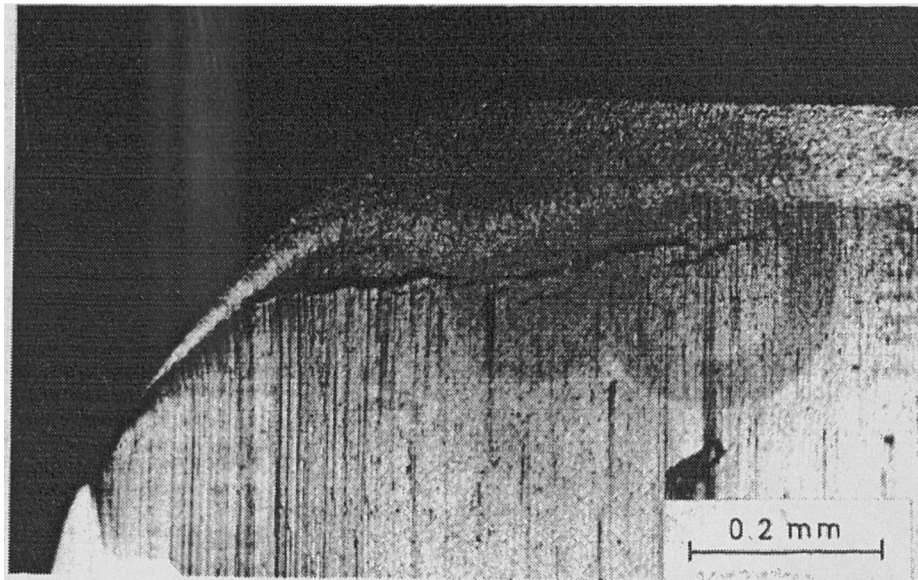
Crack across the nose of cemented carbide tool deformed during cutting [Trent (1991)].
